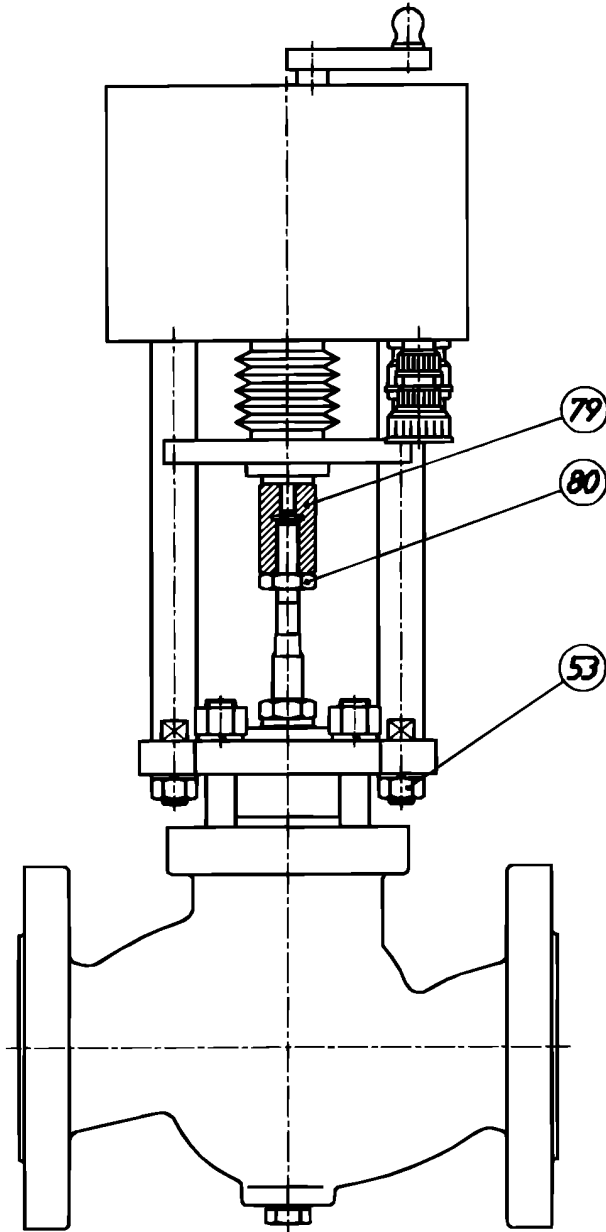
Control valve with electric actuator ESL - 03 (example)
